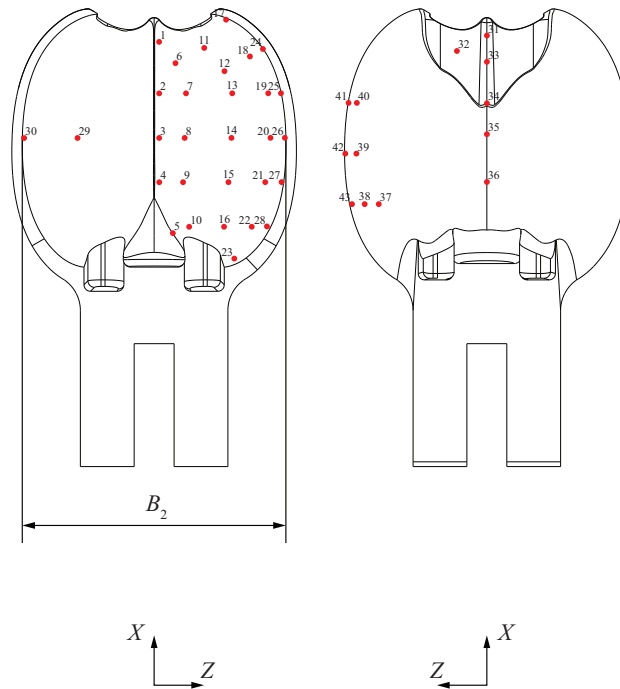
Outline of the case study. 30 pressure samples are located on the buckets inner wall and 13 on the outer wall.
